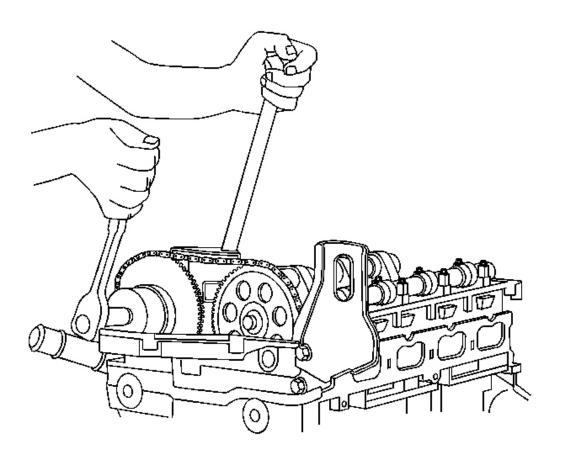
Loosening Camshaft Sprocket Bolt Courtesy of GENERAL MOTORS CORP.
